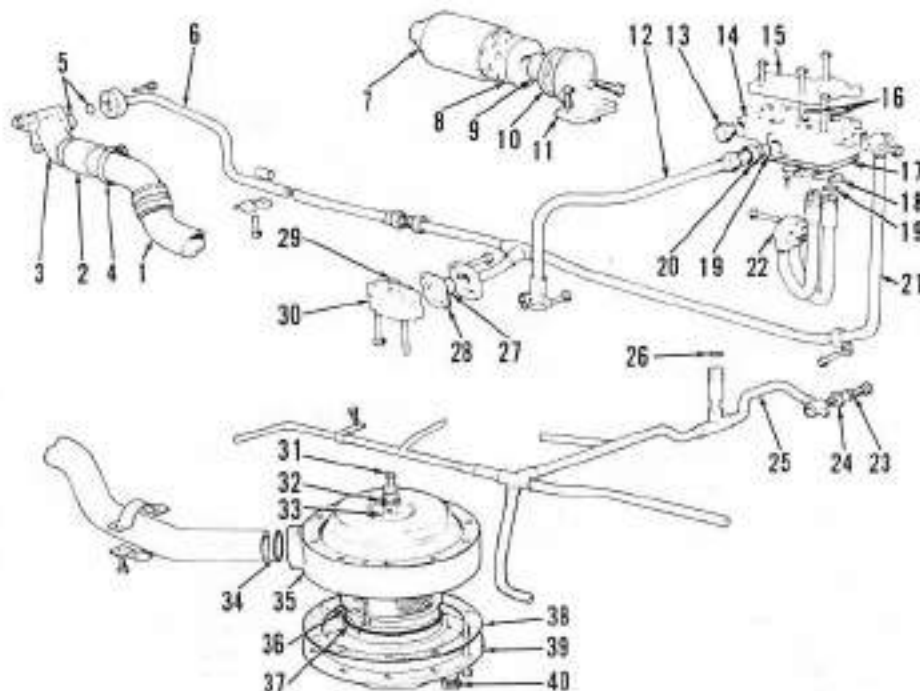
Exploded view of hydraulic lines and filters for model 1200 with single hydraulic pump. Late models with single pump have a full flow suction filter similar to that shown in Fig. 212.
